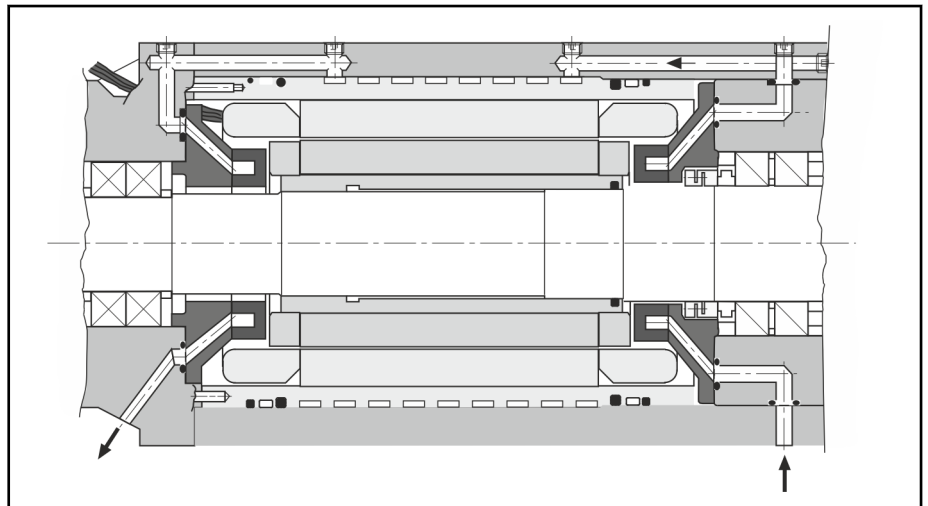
Liquid-cooled sleeves mounted near the rotor
